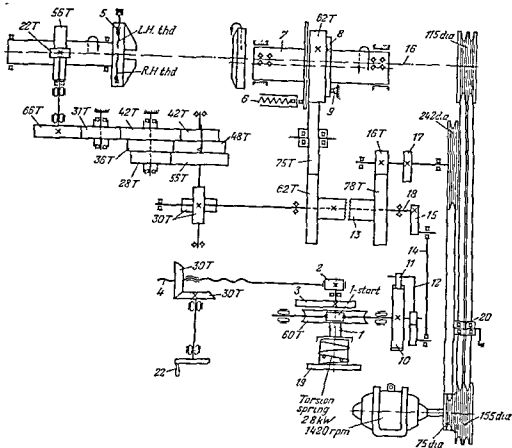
Gearing diagram of the semiautomatic grinder, model 3659A
